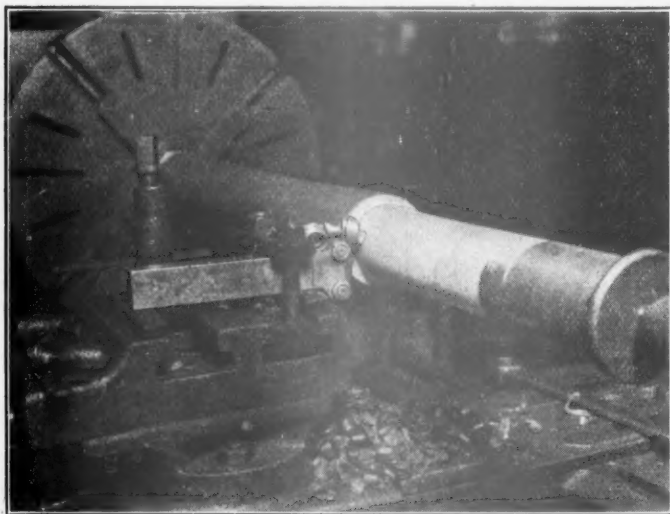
Roughing Tool Taking $\frac{7}{8}$ -in. Cut on Car Axle
